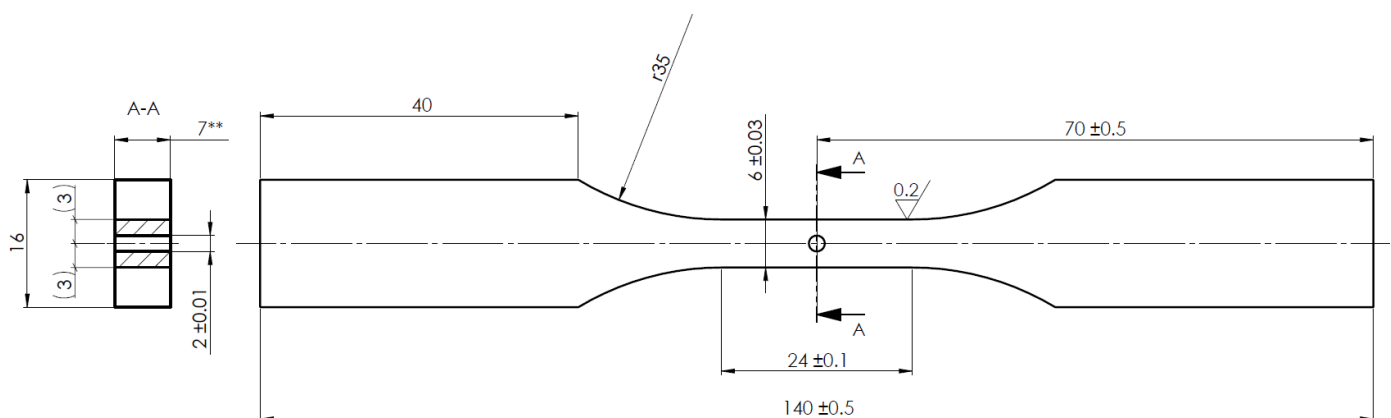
Technical drawing of notch specimen: for the smooth specimen, the gauge section is 4×7 mm, and it does not include the 2 mm diameter hole, whereas here, it is 6×7 mm due to the presence of the hole. The radius r of the transition area in the notch specimen is 35 mm, whereas in the smooth specimen, it is 30 mm. The thickness of the specimen is equal to 7 mm and the symbol  indicates it comes directly from the hot-rolled coil, where the tolerance follows the UNI EN 10051 standard [26].
